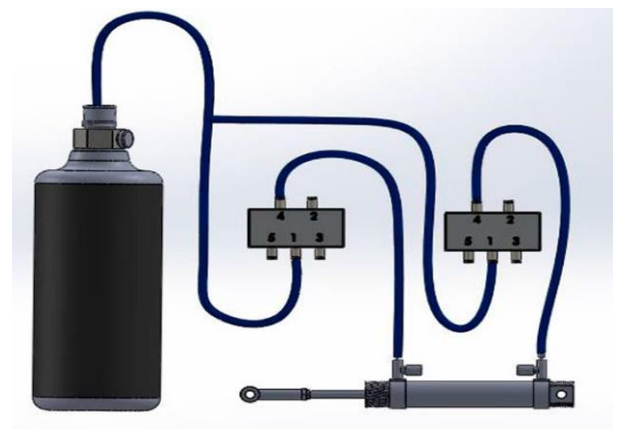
Compressed gas cylinder, 5/2 valves, and the actuator comprising of the whole pneumatic shifting system.
